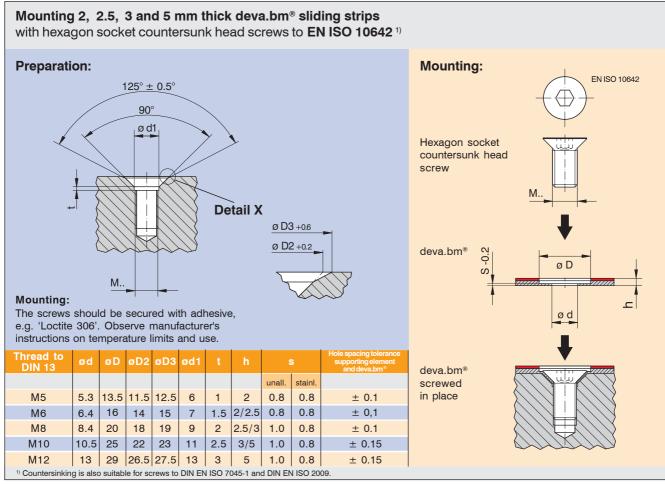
Fastening deva.bm® sliding strips with hexagon socket countersunk head screws
